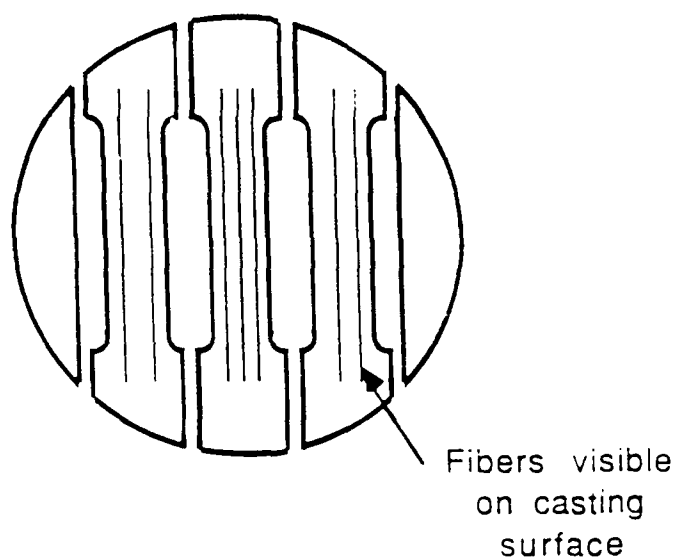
Schematic illustration of tensile specimens from unidirectional fiber reinforced casting showing relative location of specimens
